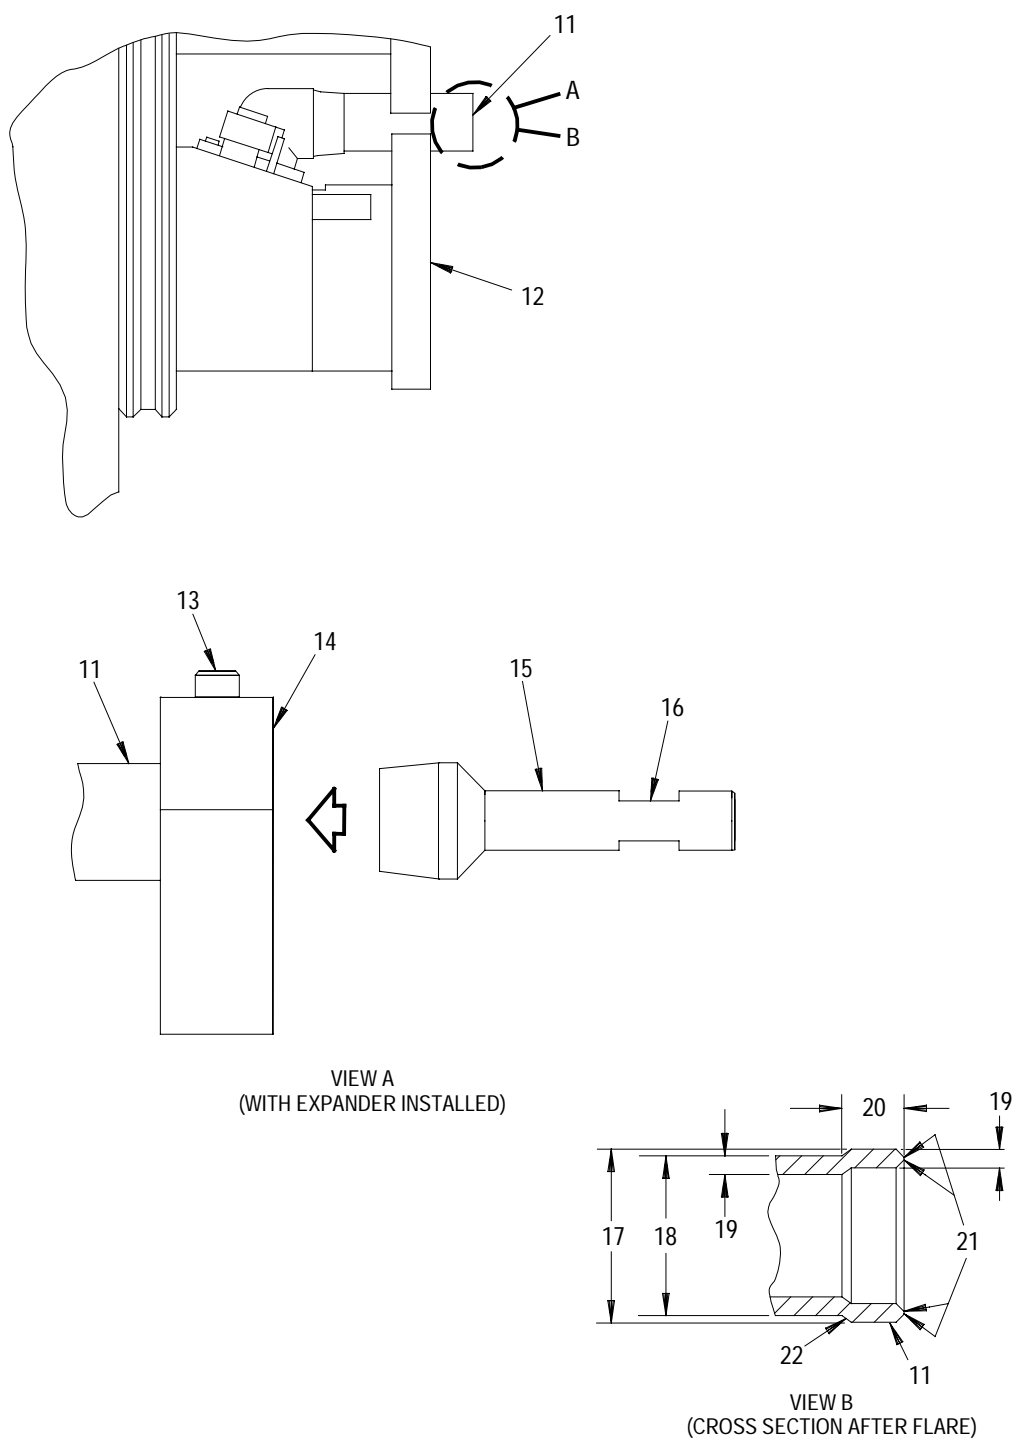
No. 4 Bearing Air Supply Tube Assembly - Worn Ferrule Replacement (Sheet 1 of 2)
